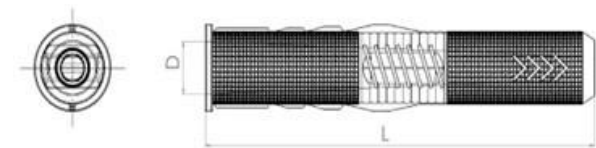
All dimensions of Reptiles drywall anchor in (mm).
